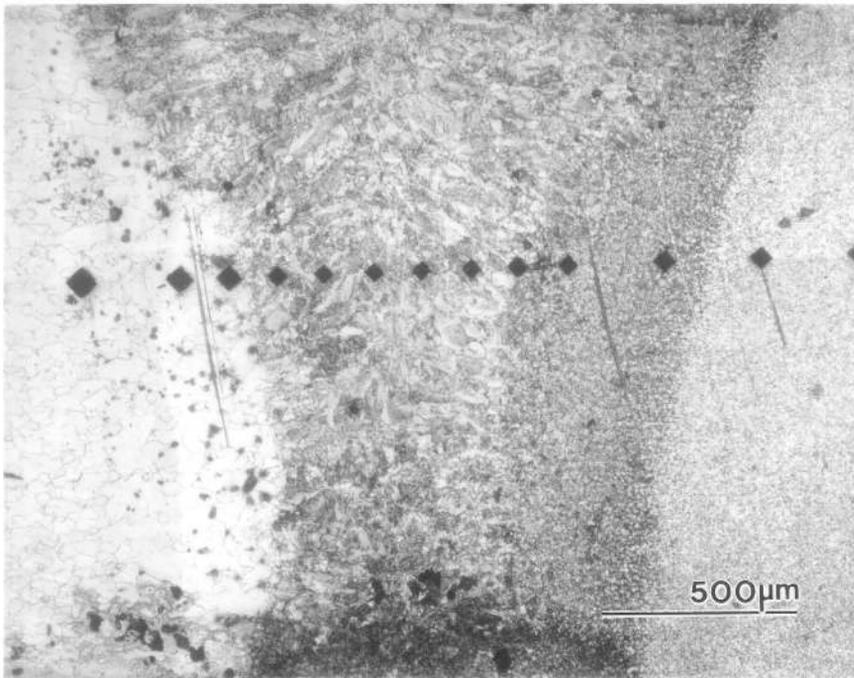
The microstructure for the weld bead of the YAG laser HS2.1/AK1.8 blank.
